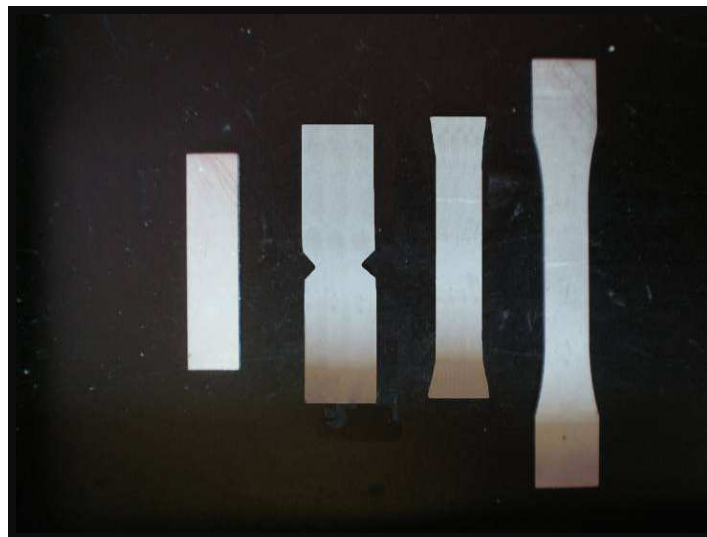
The stainless steel dies used in the specimen manufacture for the following tests: (from left to right), flexural, shear, compressive and tensile strengths and moduli
